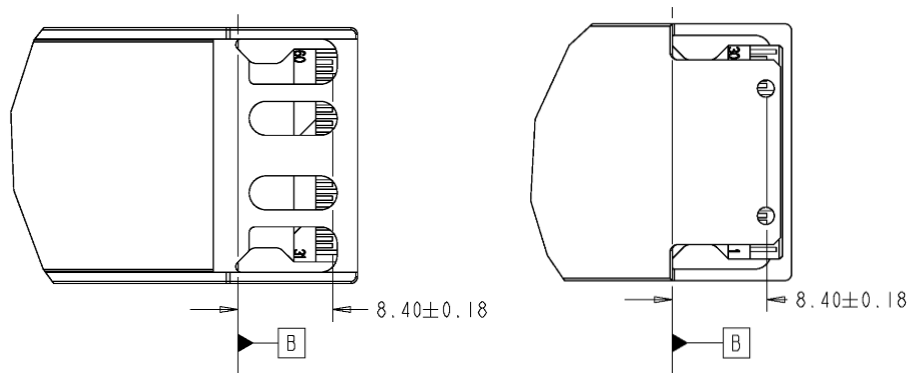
Signal pad location to module (left: top view, right: bottom view)
